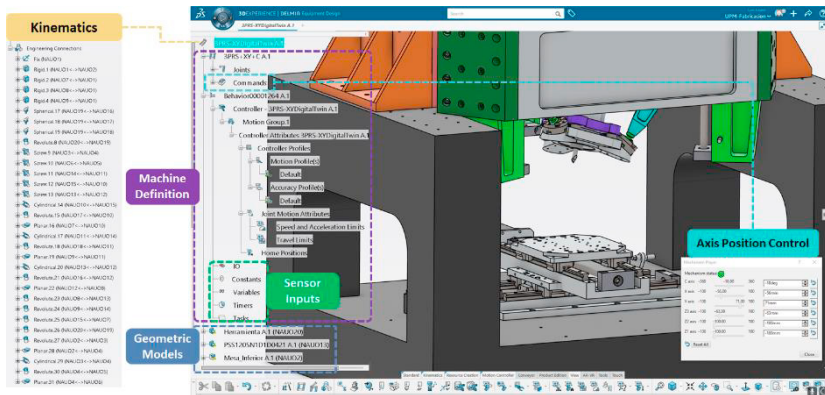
Digital machine tool integration in 3D Experience DELMIA Equipment Design.
